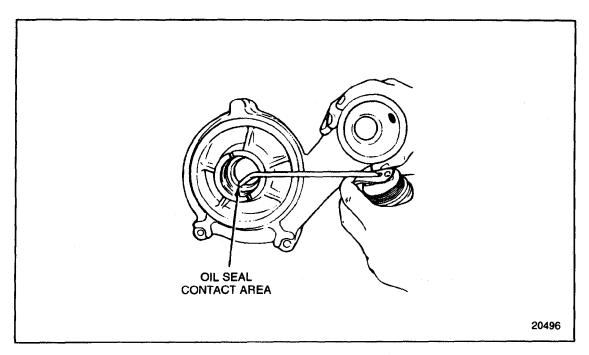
Oil Seal Contact Area Lubrication (FM)
